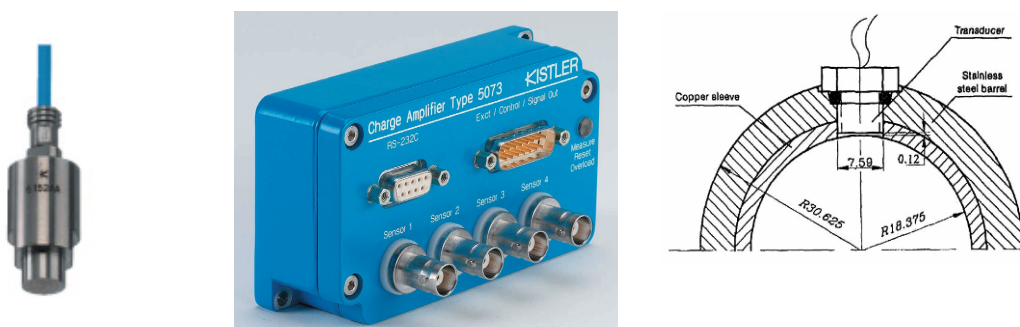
Kistler 6152 mold cavity pressure sensor, amplifier and mounting method (Kistler 6152 user manual)
